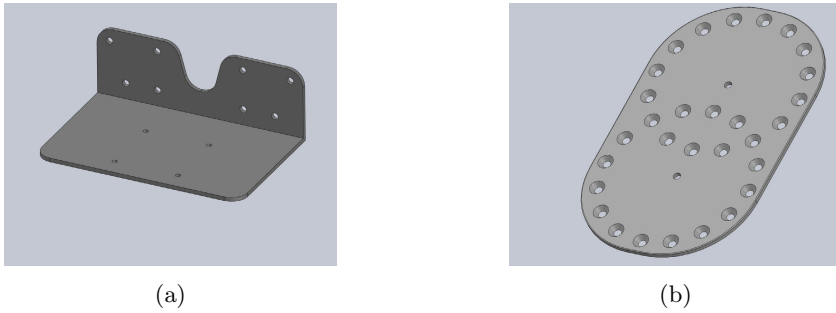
(a) a CAD model of the laser mounts, (b) a CAD model of the arm extension plate
